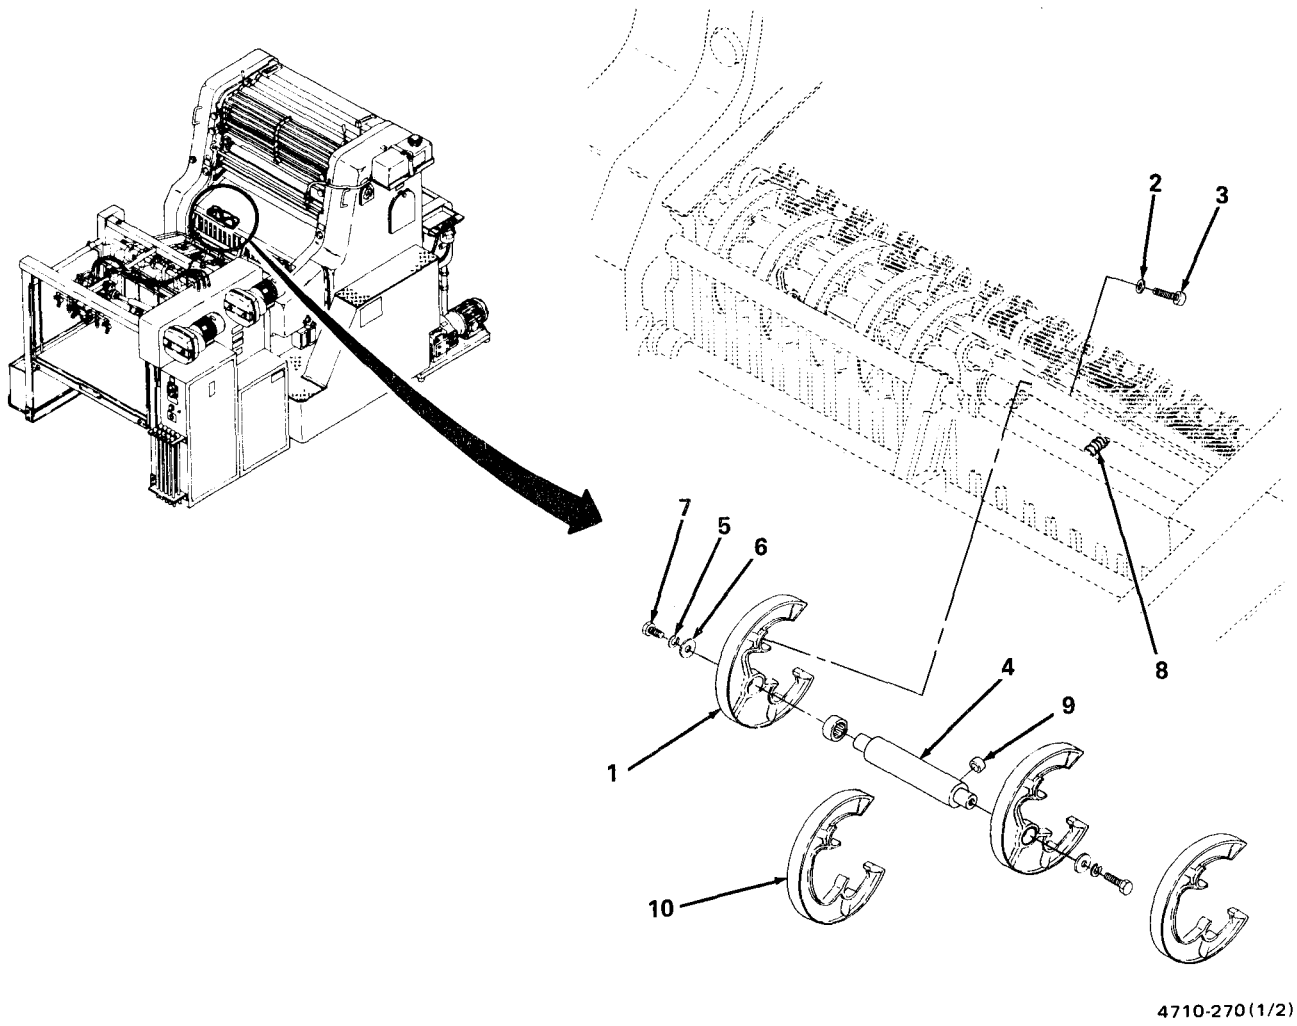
Ranger Drum Sheet Segment Assembly.
